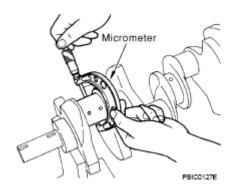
Measuring Outer Diameter Of Crankshaft Pin Journal
